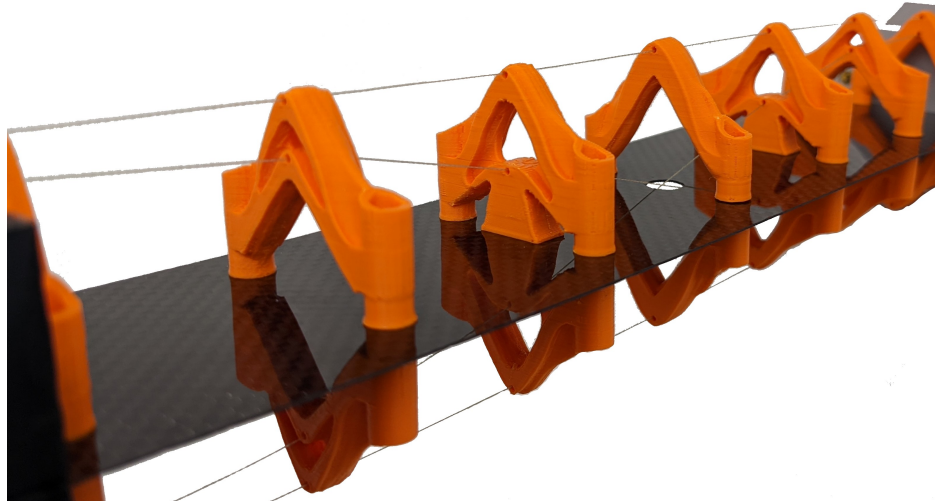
Topology optimized 3D printed cable support assembled on the backbone.
